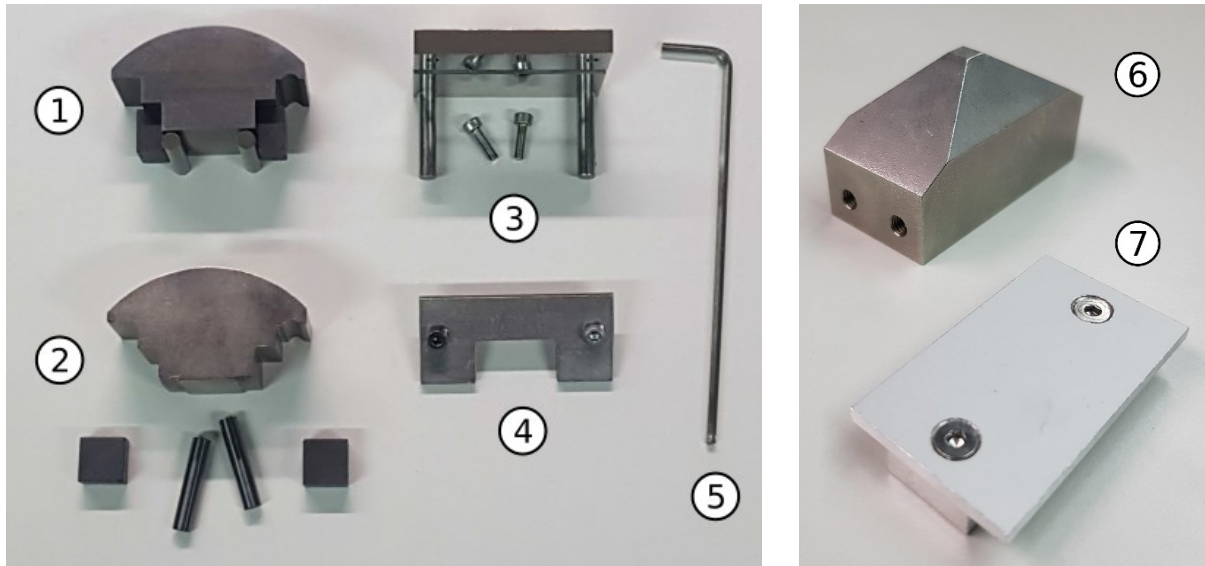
Upper parts of the load cell for 4-point bending and upper and lower parts for the compression test: (1): hard metal support with mounted hard metal rollers and magnets; (2): steel support (VA) with separate rollers and magnets; (3): support plate for the back side of the load cell; (4): Plate for the front of the load cell; (5): hex wrench for the screws; (6): upper part of compression load cell; (7): lower part of compression load cell.
